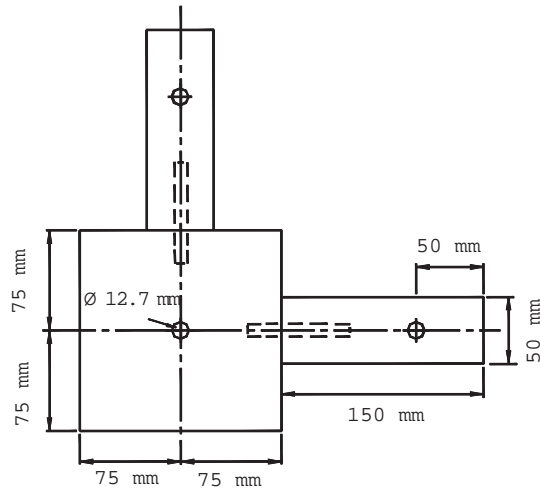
General configuration and dimensions of edge withdrawal specimens.
